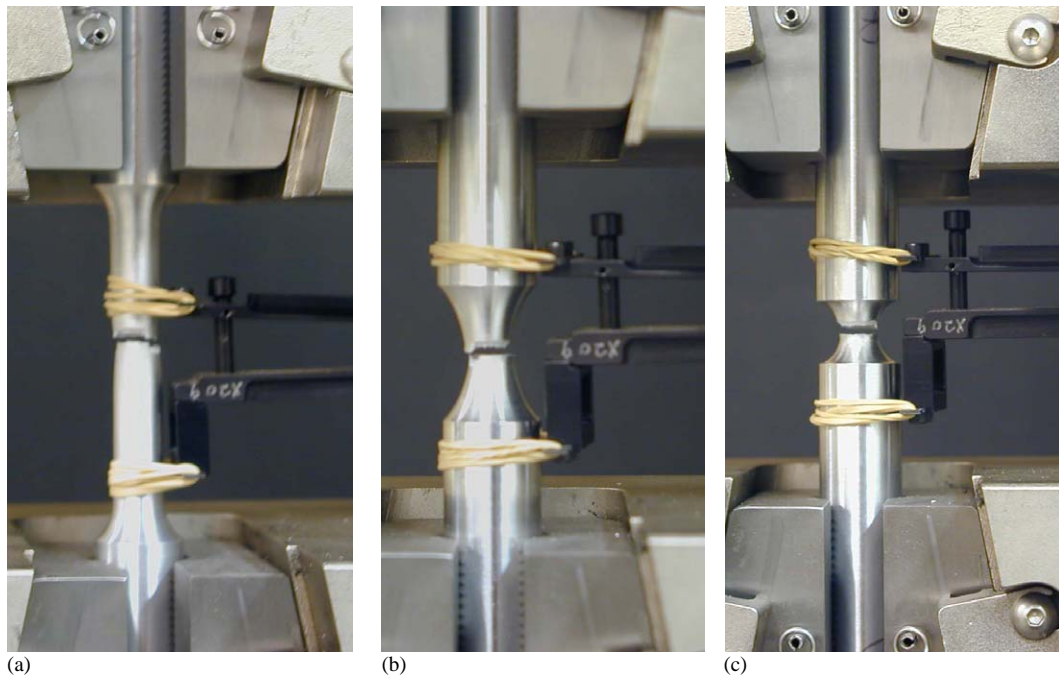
Fractured tensile specimens. The specimens have the same diameter (9 mm) of the minimum cross section): (a) smooth; (b) $R = 12$ mm and (c) $R = 4$ mm.
